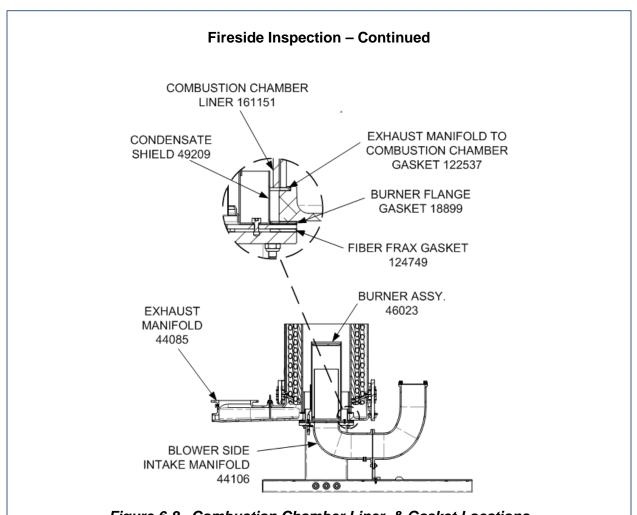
Combustion Chamber Liner & Gasket Locations
